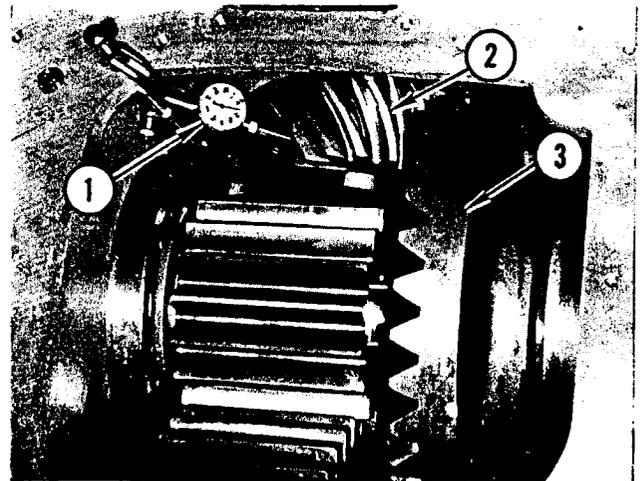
ADJUSTING PINION AND GEAR BACKLASH
